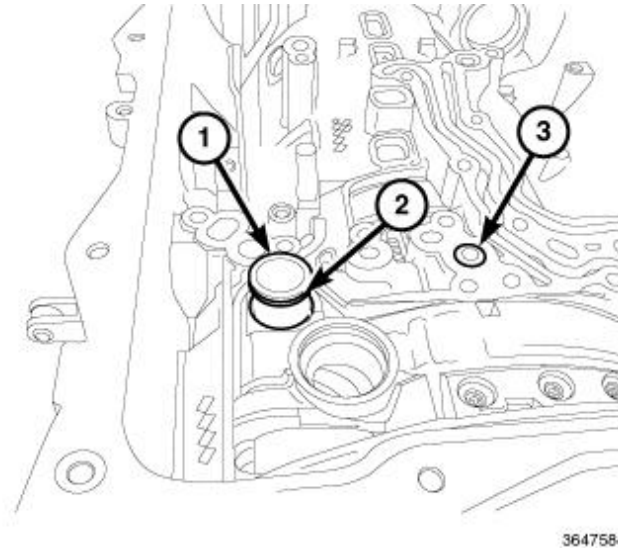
Fluid Port, Two O-Rings, Compression Seal
